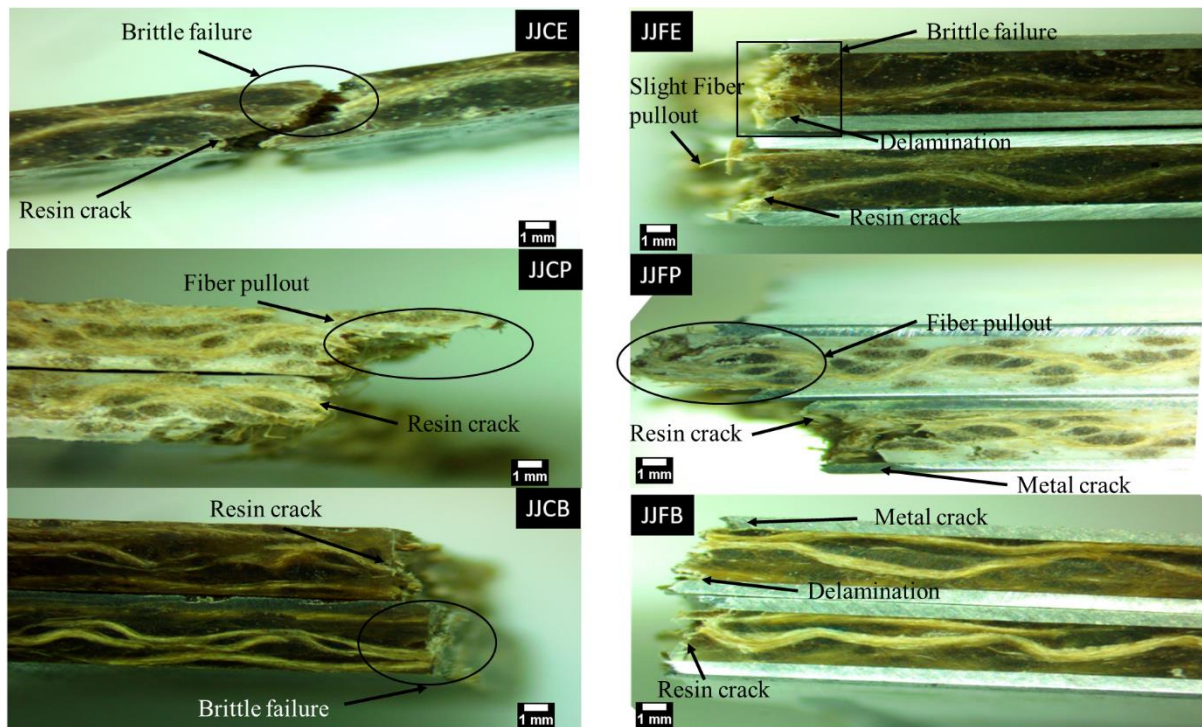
The cross-section of fractured samples after the tensile test of 2D jute + 3D jute composite and FMLs
